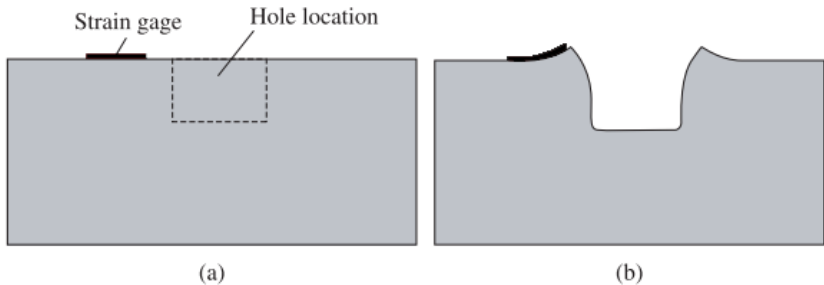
Schematic cross-sections around a hole drilled into tensile residual stresses (a) before hole drilling and (b) after hole drilling [8].
